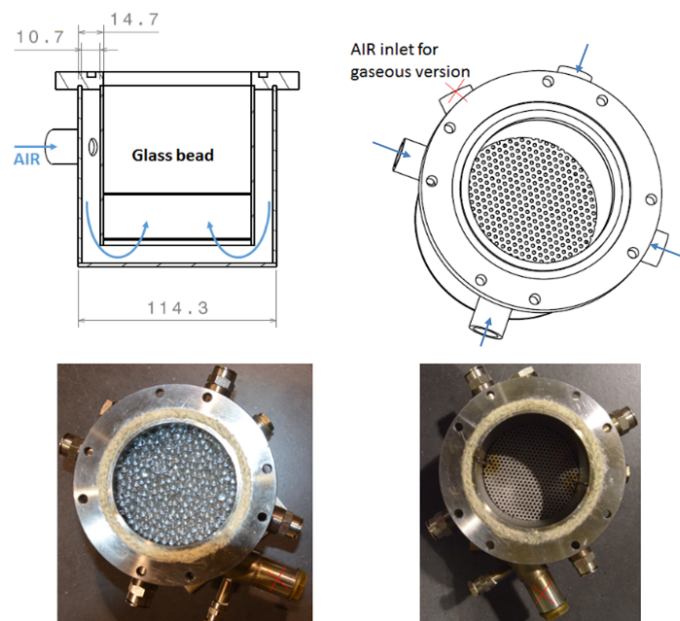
Plenum of the KIAI chamber. Top: drawing. Bottom: photographs with and without glass beads.
